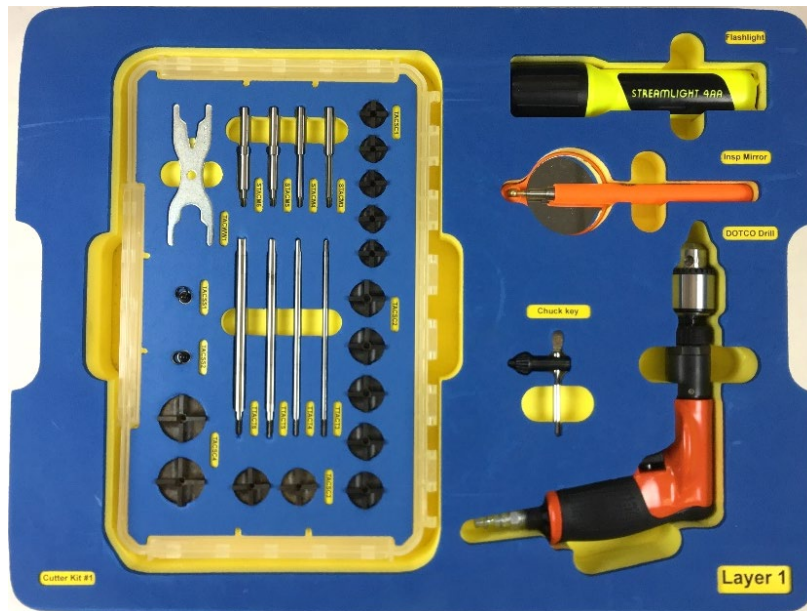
Surface Preparation Kit – Layer 1: Drill Motor & Associated Torlon Adhesive Cutter Kit
